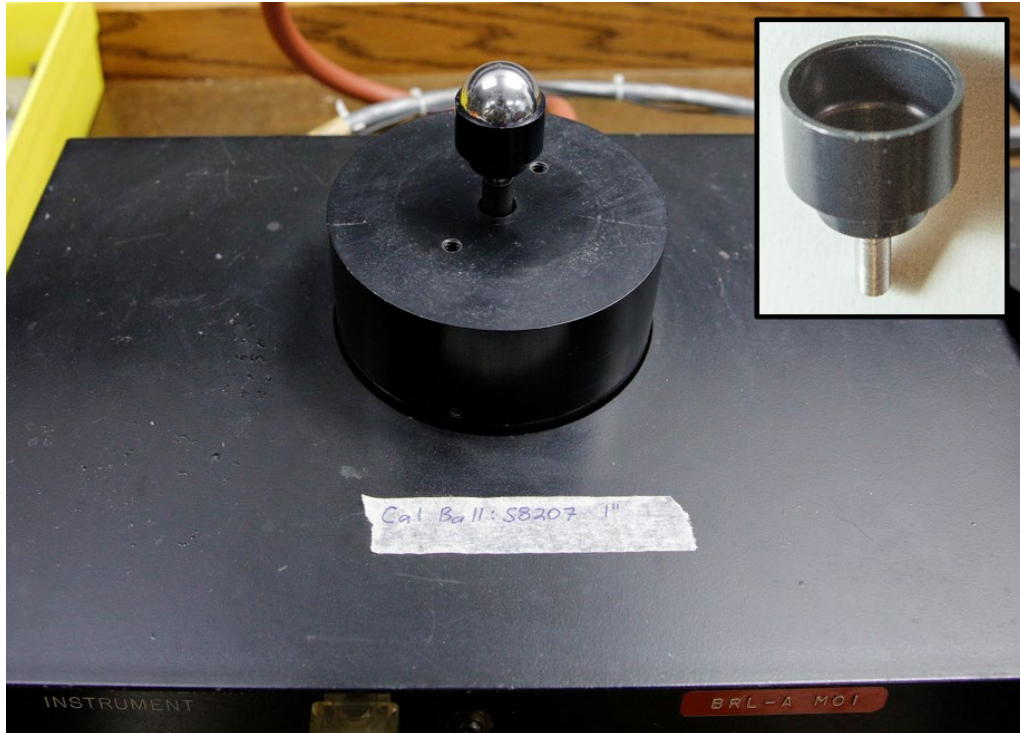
Calibration ball and mounting fixture on MOI-A (BRL-A MOI) machine (fixture shown as inset).
